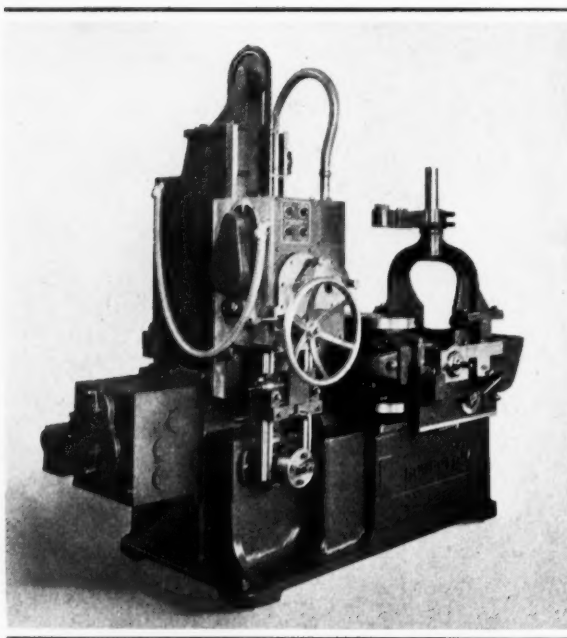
Rowbottom Combination Cam Milling and Grinding Machine Set up for an Operation on Drum or Side Cams
